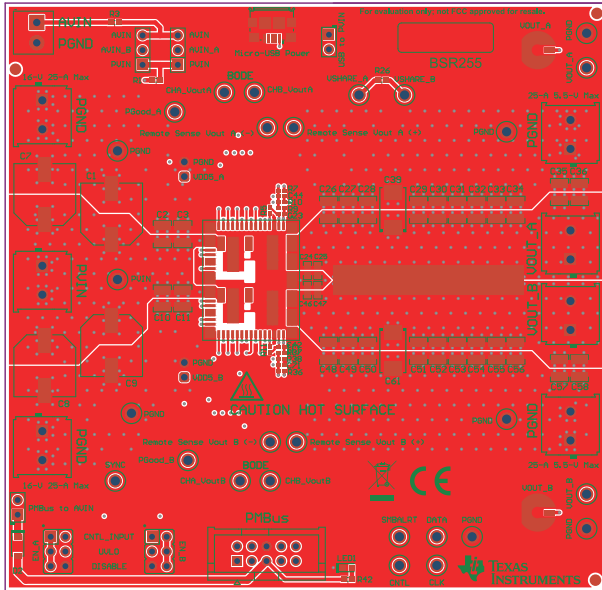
TPSM8D6B24EVM-2V0 Top Side Component View (Top View)
